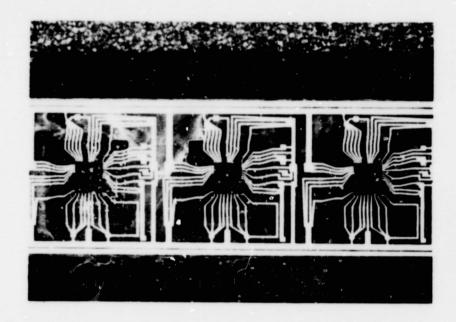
Tape carrier patterned for Type 342 LSI devices.
